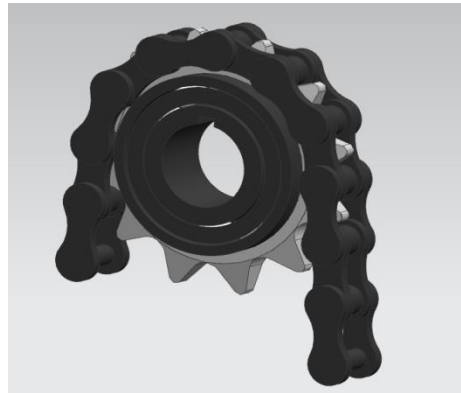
UG three-dimensional diagram of chain and sprocket wheel
